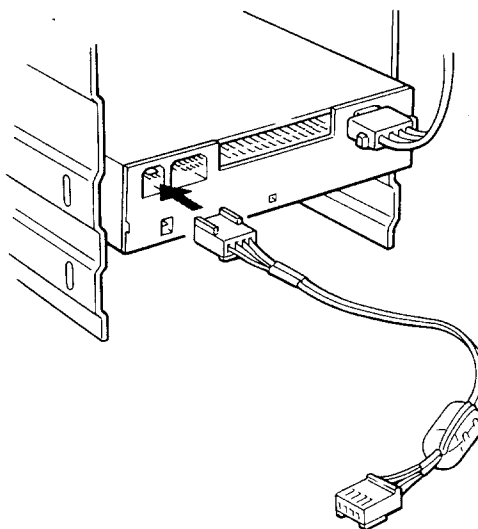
Attaching the Audio Connector Cable to the Drive (Model CDU-531 Drive Shown)
